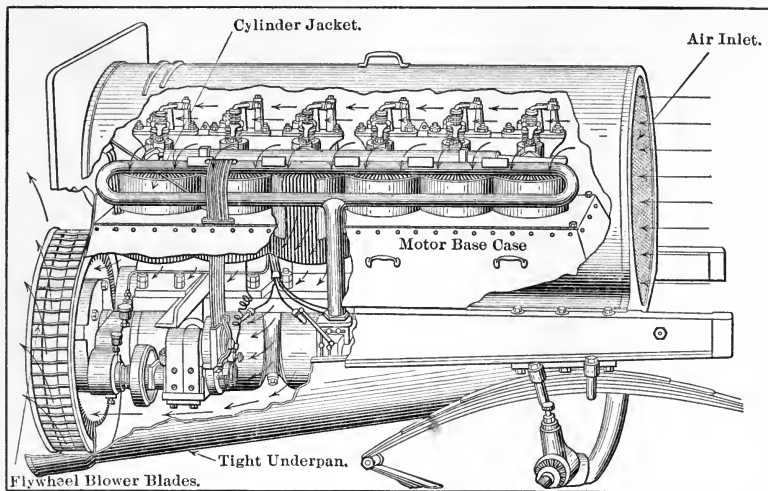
Positive Cooling Method Used on Franklin Automobiles in which Air Currents are Drawn Through Cylinder Jackets by Fly-wheel Fan Suction.
